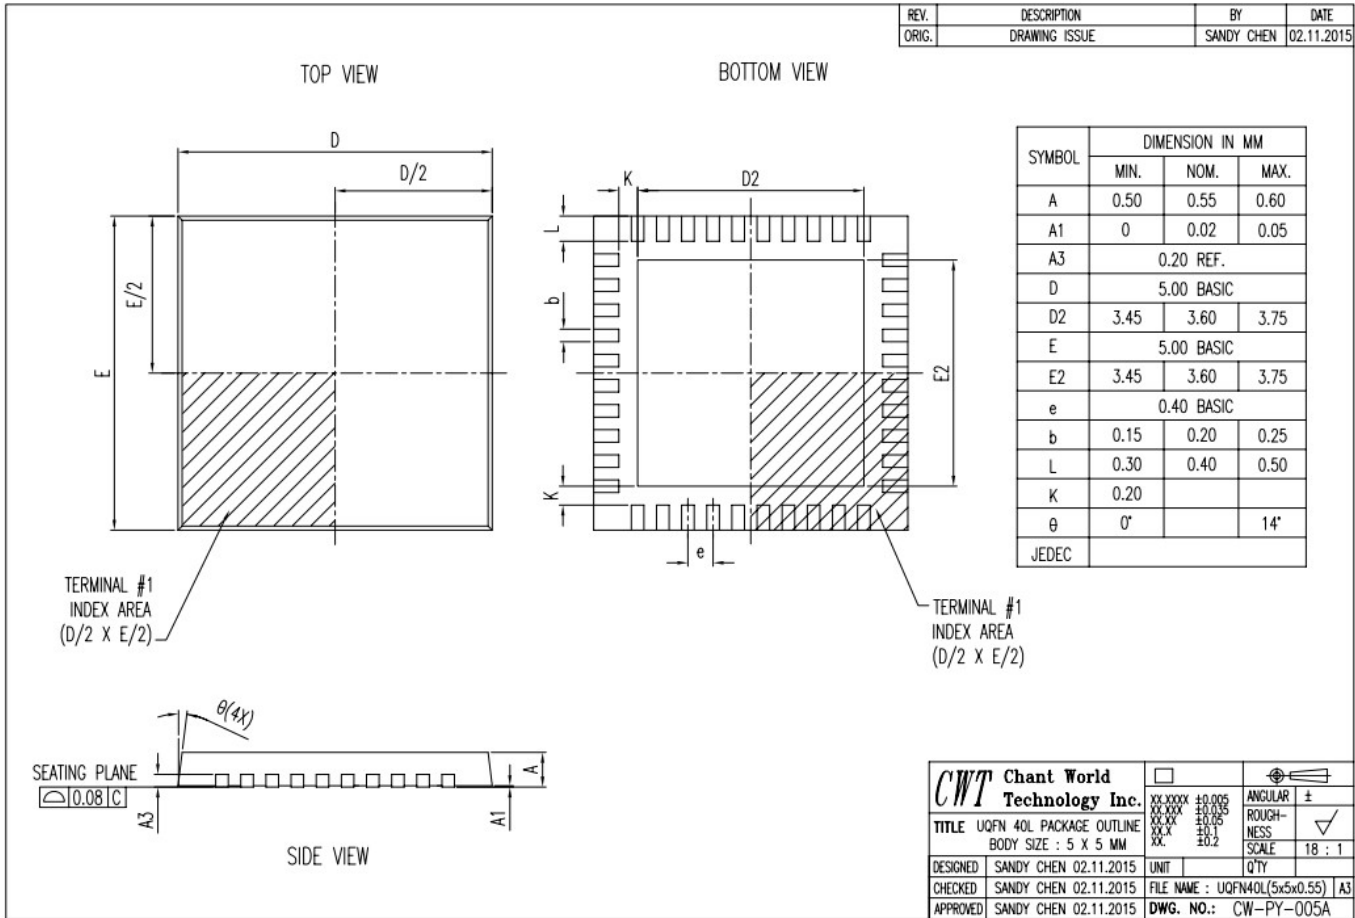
Outline Dimensions of QFN40 Package with Exposed Pad
